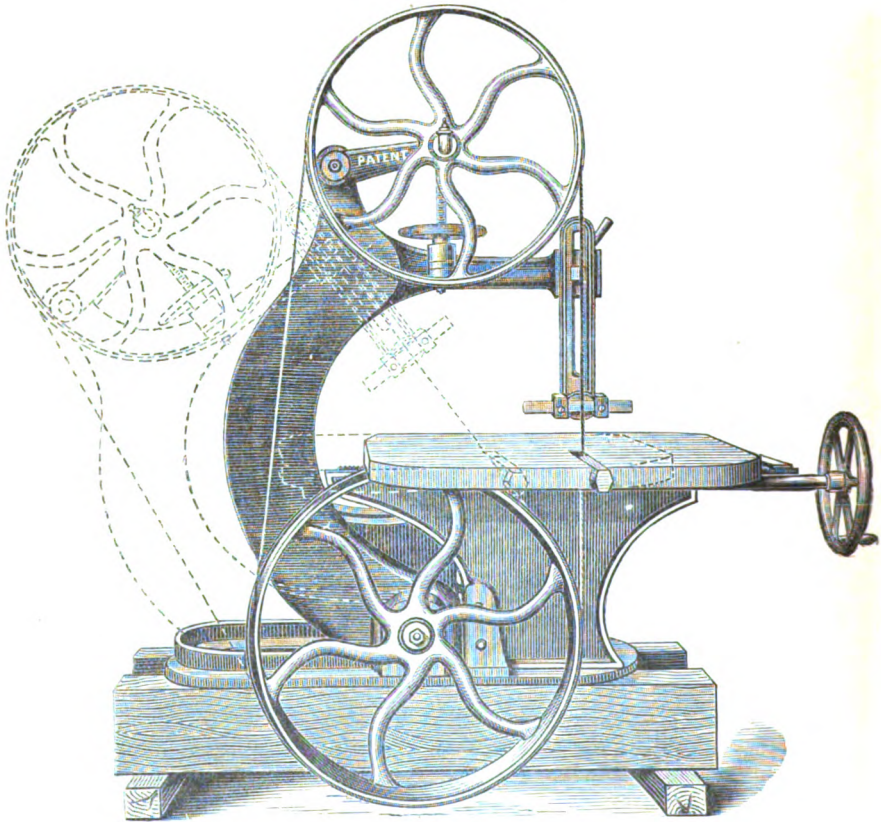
KNOWLING'S PATENT BAND SAWING MACHINE.
